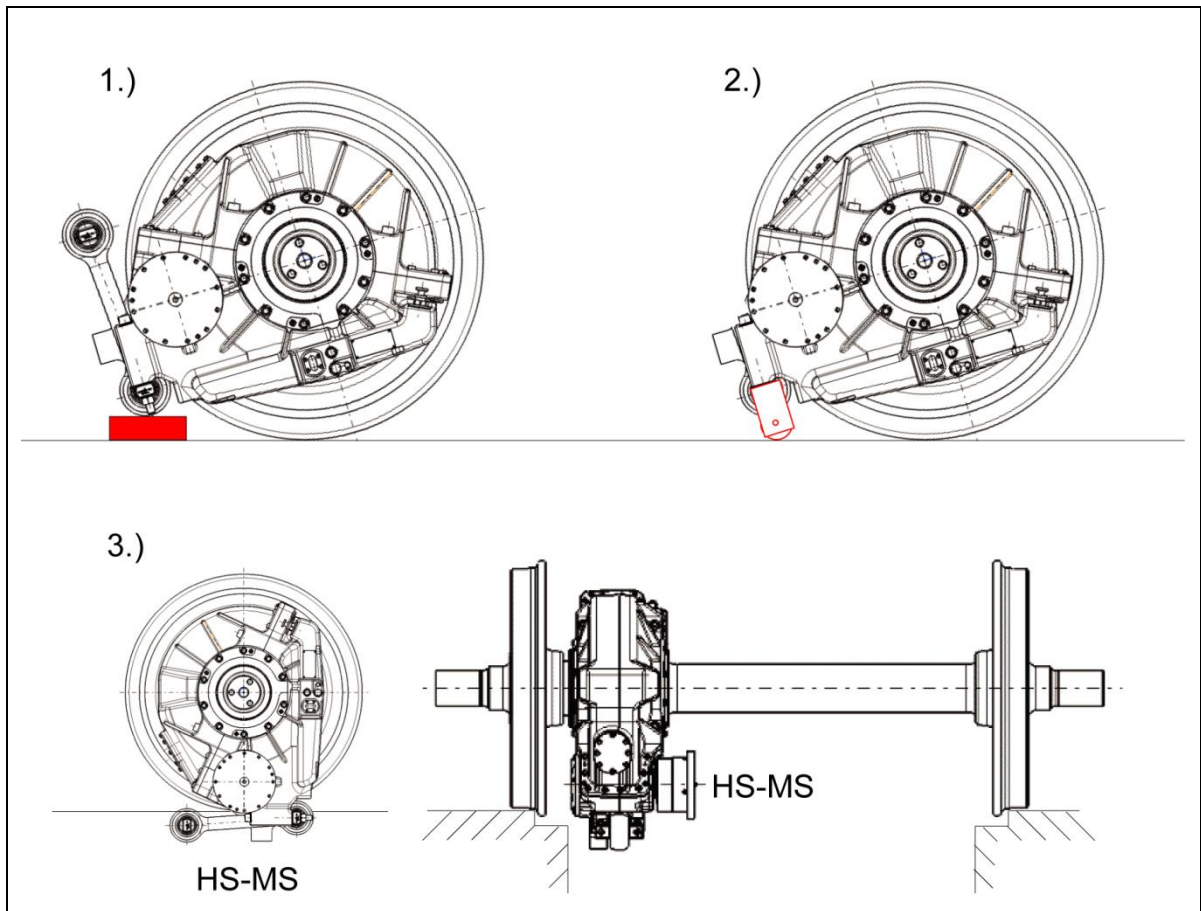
Storage and moving of Traction Gearbox assembled on wheelset shaft and drive wheels
